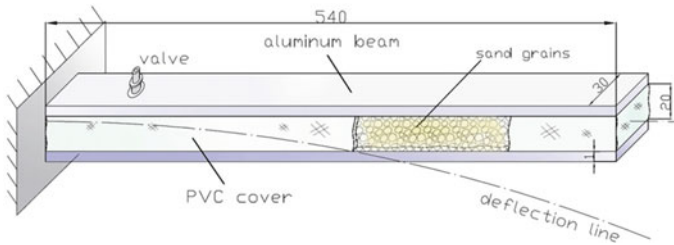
Construction of a layered beam with a pressurised core made of kinetic sand (dimensions in mm)
